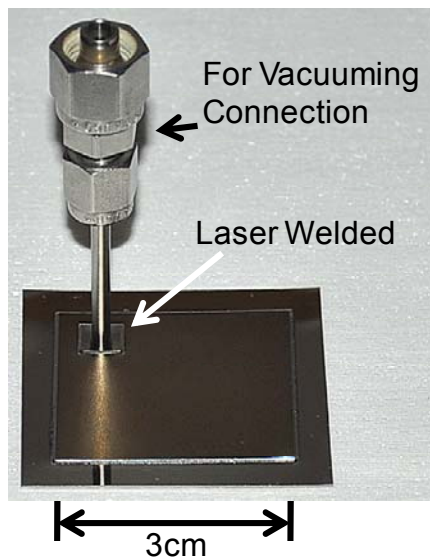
Laser welded device for hermeticity test. The device connects to the testing instrument by a 1/8 inch tube which is laser welded to the heat pipe.
